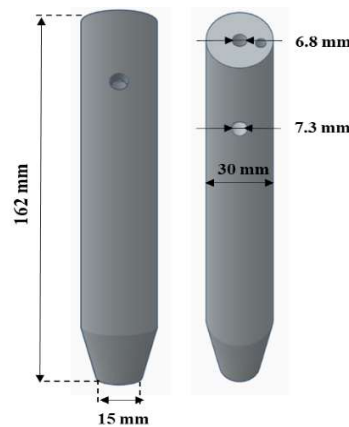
Layout and dimensions of the device-sized enclosure.
